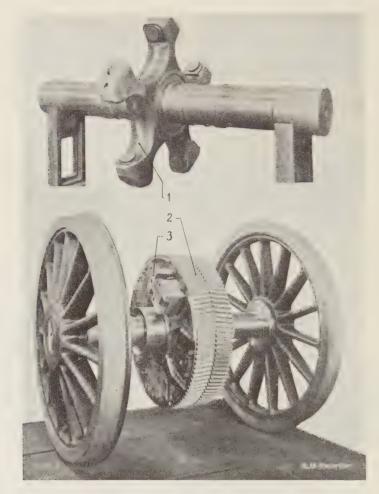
Driving axle with spring drive in the toothed wheel with double rim and shaft with 5 armed spider of the SLM II Universal drive of the NS (13) locomotives $(1A_0)B_0(1A_0)$.
